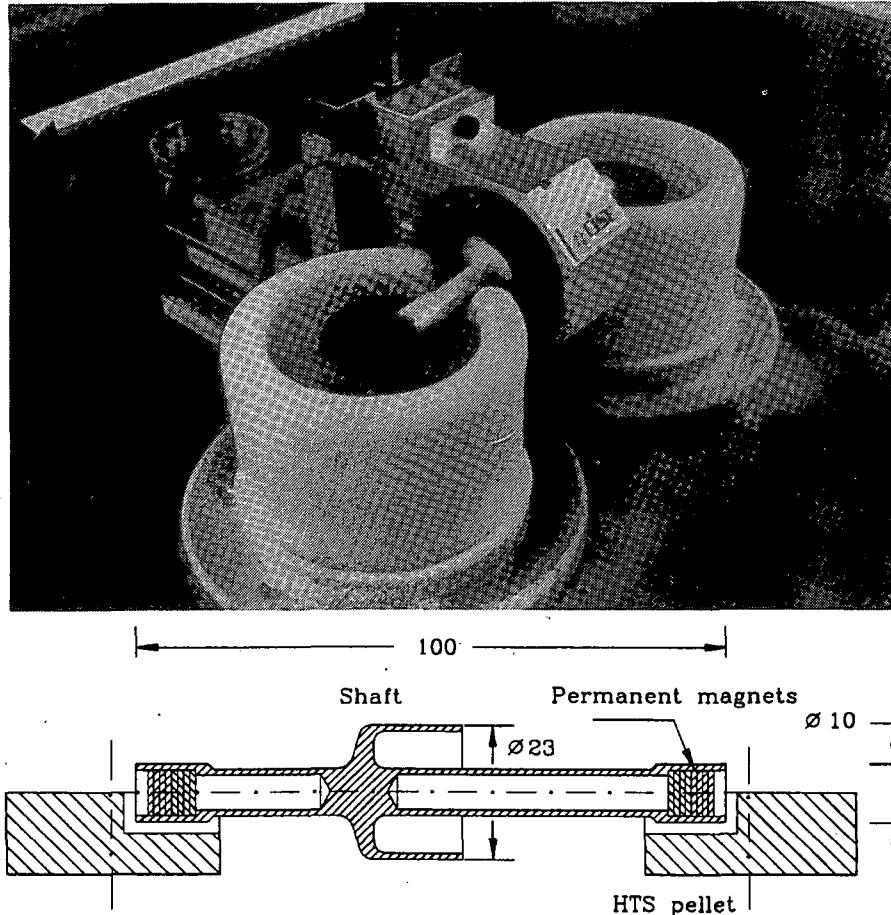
High speed (120000 rpm) asynchronous motor using HTS bearings. Picture and schematic drawing of the rotor and the bearings.
